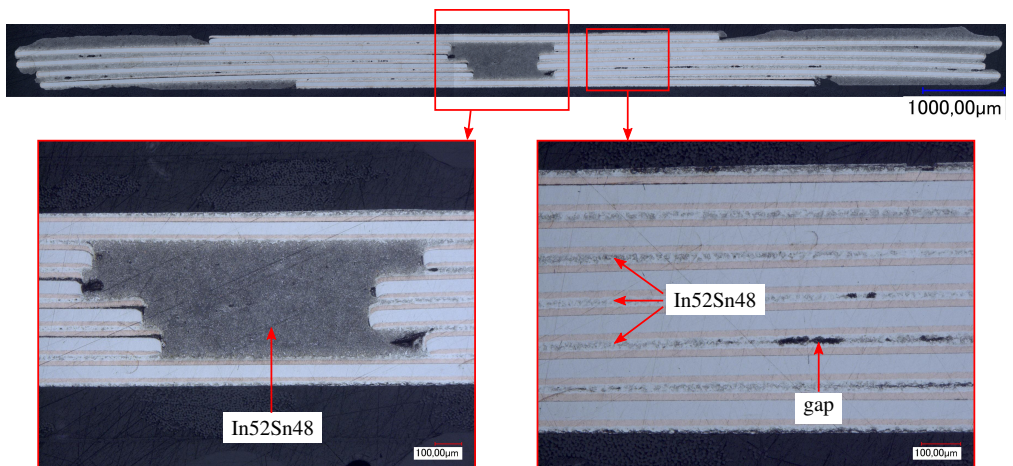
Cross-section of soldered cable 1. The central hole in of the cable is filled with In52Sn48 solder at the site of this cross-section
